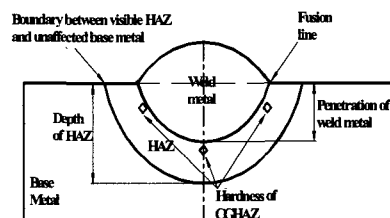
The cross sectional view of the bead-on-plate weld
